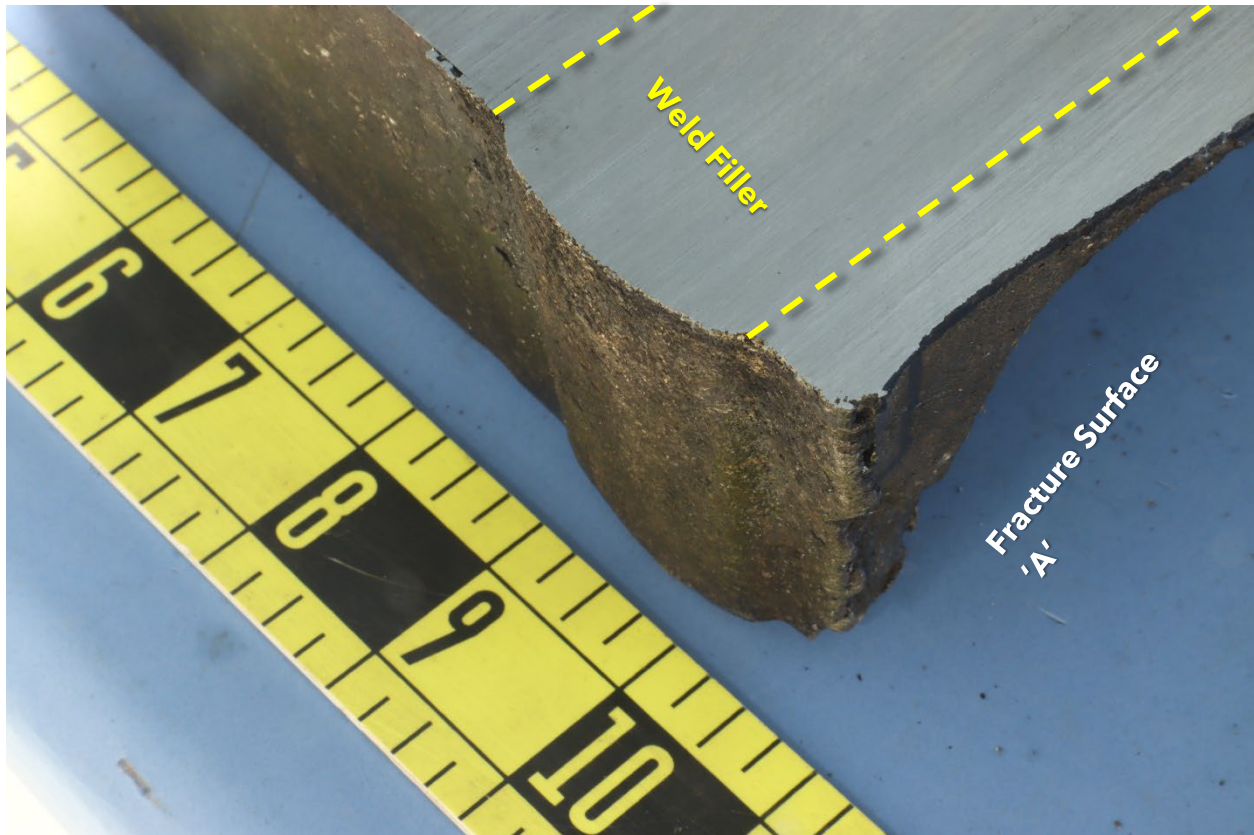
Corner view of the fracture surface, base surface, and longitudinal cross section of the downstream rail.
